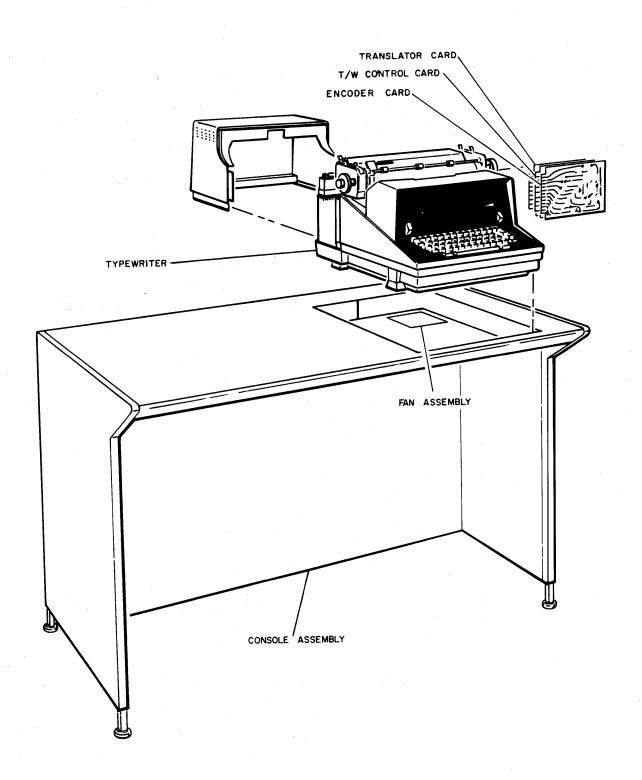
RPC 4480 TYPEWRITER ASSEMBLY
